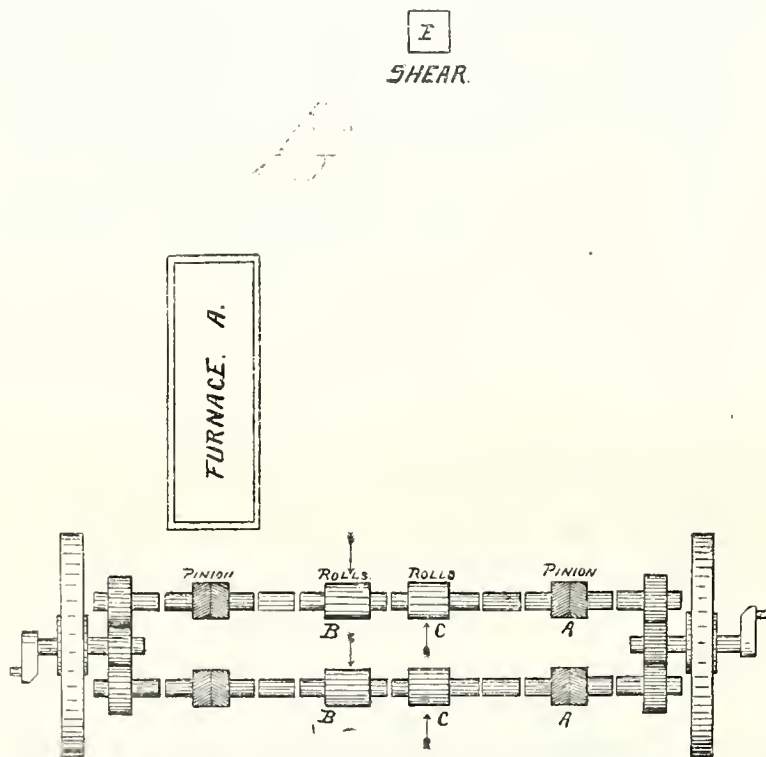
The Howell Continuous Sheet Rolling Mill.
